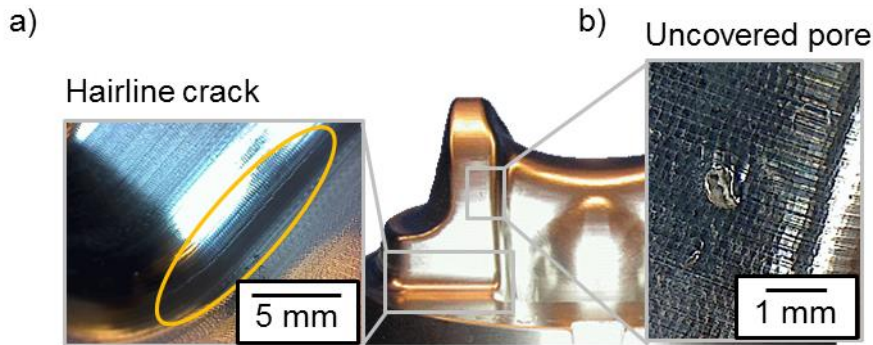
Uncovered defects after surface machining: a) hairline crack at the bonding area of the additive manufactured active element and the machined base body and b) uncovered pore at the tools shoulder
